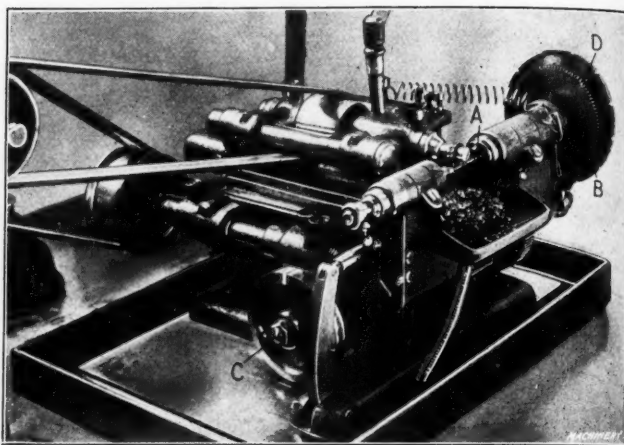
Automatic Three-cutter Pinion-cutting Machine
